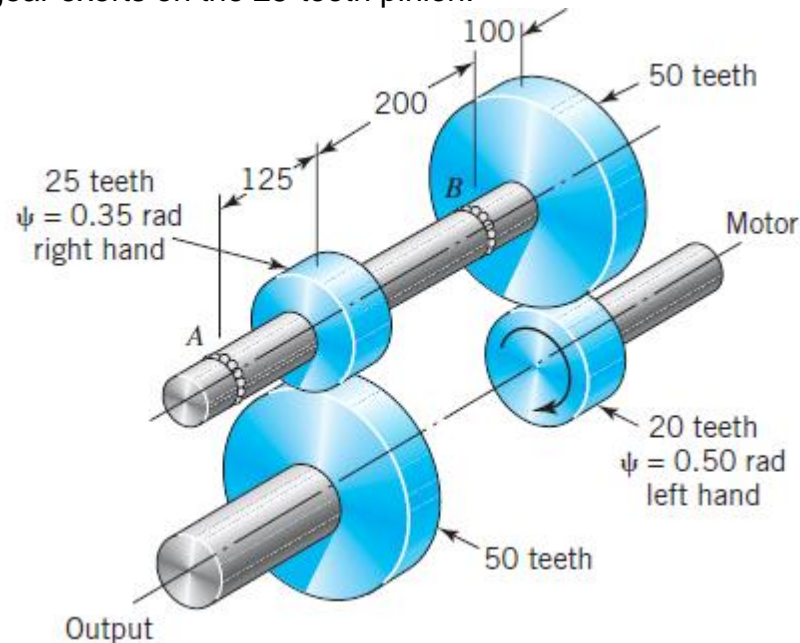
Helical gear assembly (ref: Fundamentals of Machine Component Design, 5th Edition, Wiley.)
